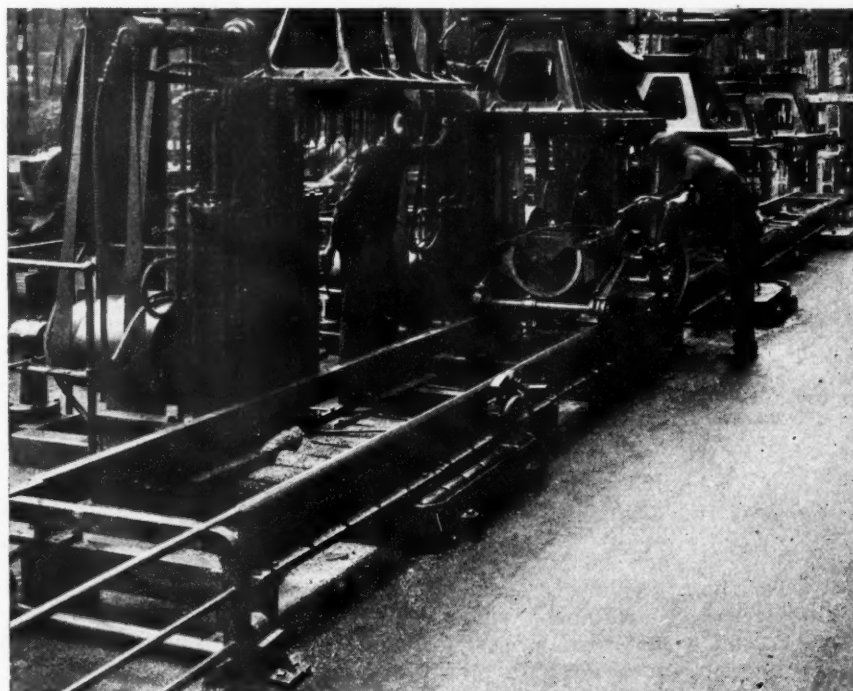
Railroad fixture which drills all holes in aluminum crankcase. This fixture is operated by two men and requires approximately 3 min. for drilling all the holes
